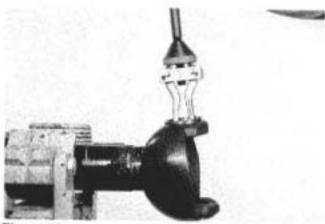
west Remove king pin bearing cupe from spherical ball yoke, with tool as shown.
